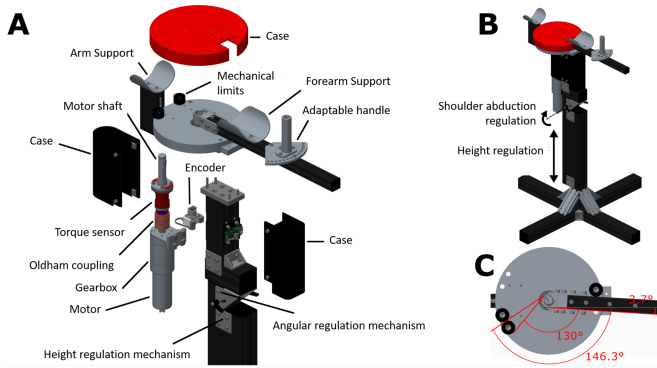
Mechanical design of the proposed device. A) Exploded view; B) Full view, with details on possible regulations to adapt the device to the user; C) Top view, with details on mechanical limit bumpers and joint range-of-motion. The device can be mounted as to be used with both arms, in C) the components are mounted targeting the usage with the left arm.
